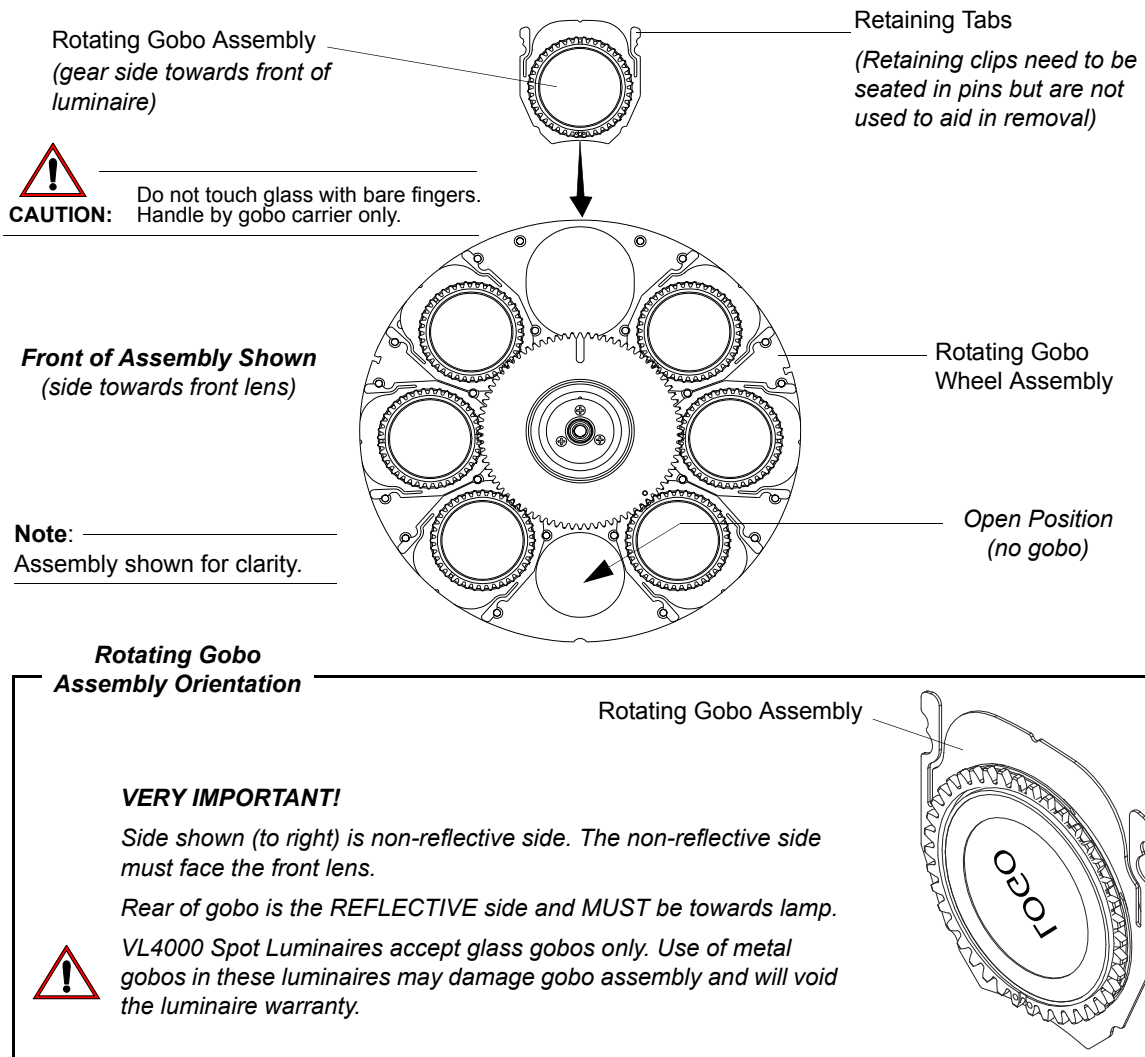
Rotating Gobo Wheel - Gobo Installation
